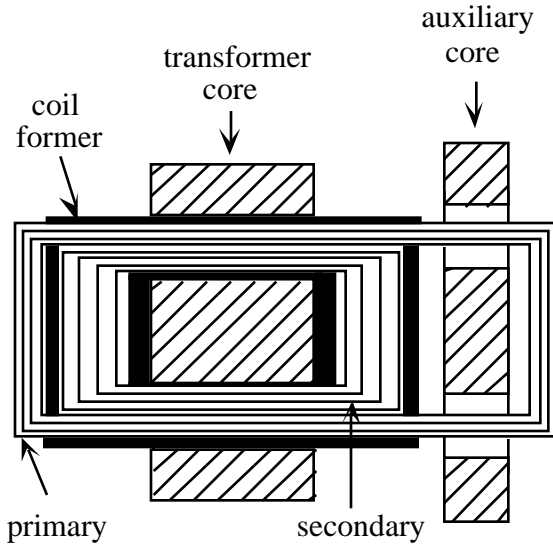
A cross-section of integrated transformer-inductor with auxiliary core. The cut is in parallel to the windings plane.
